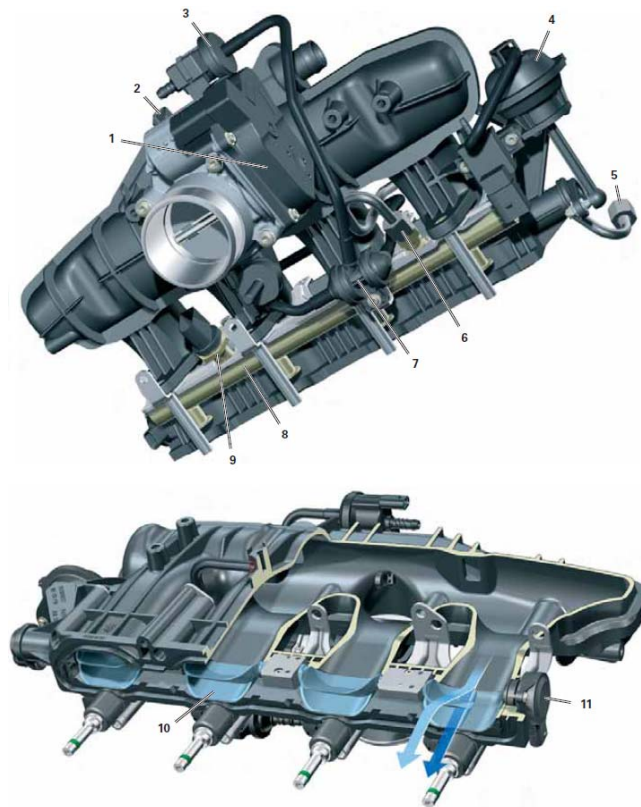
Air intake manifold module in 1.8 TSI engine [5]
